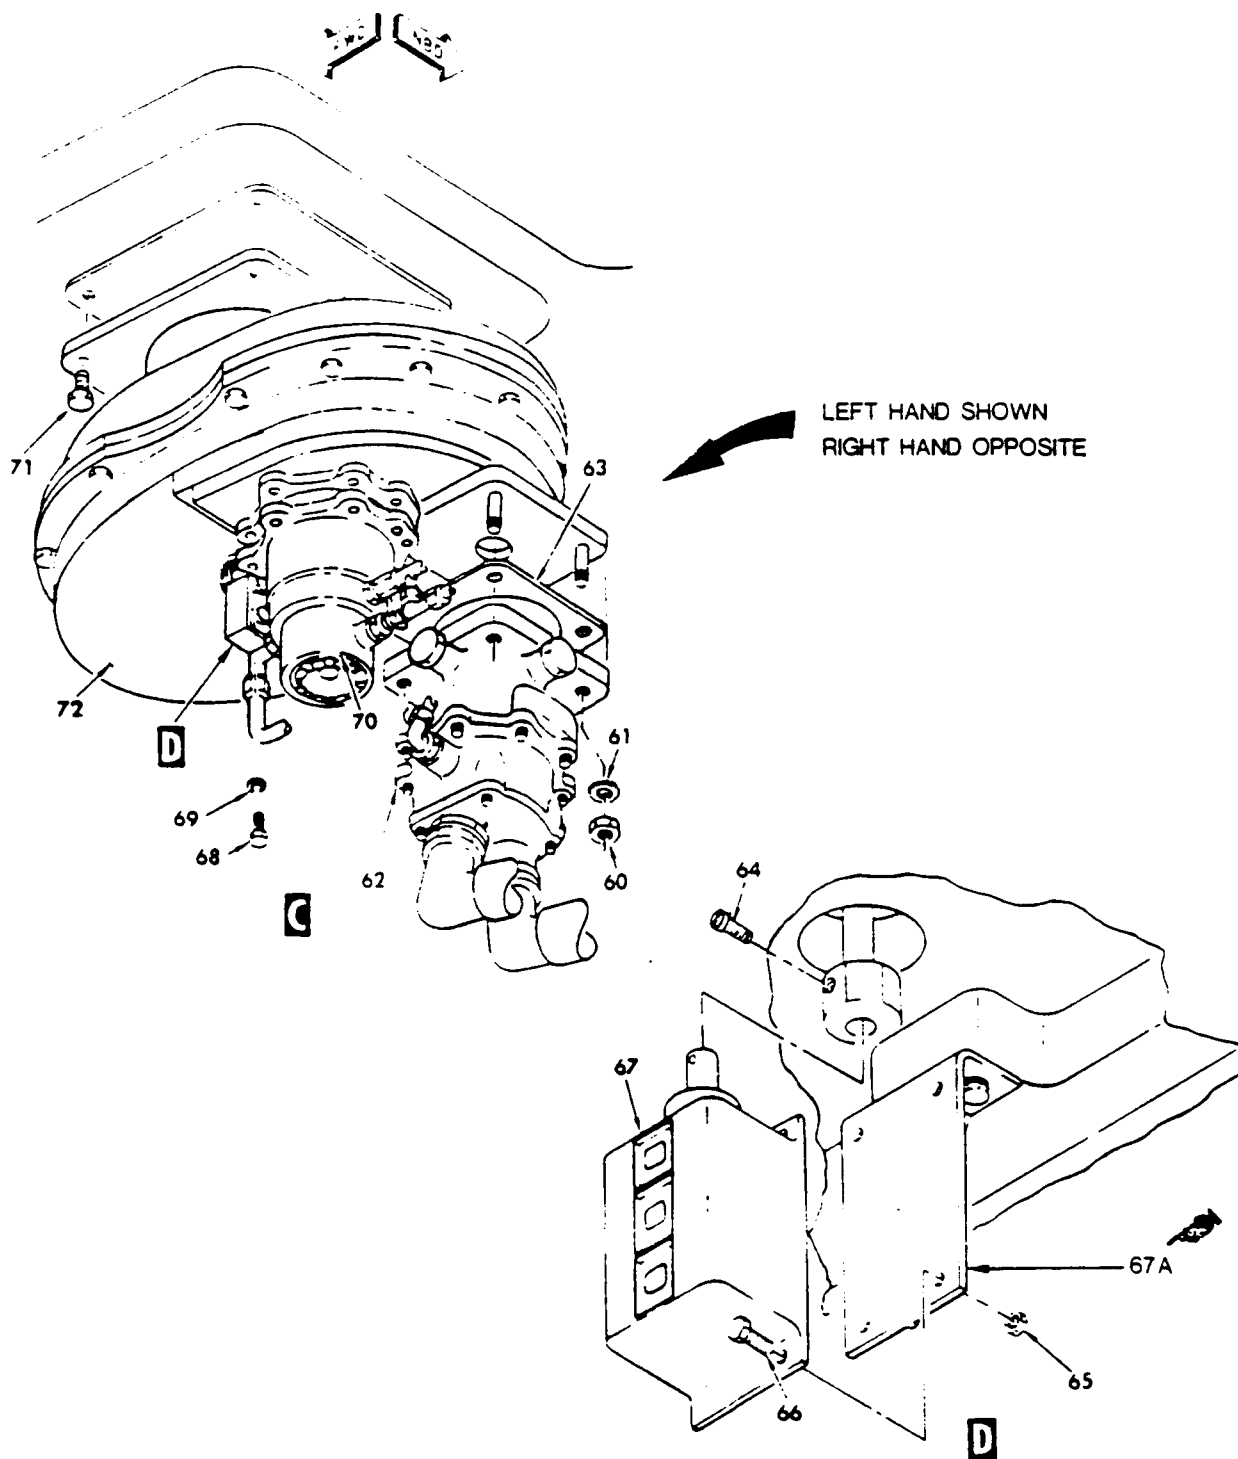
RH Aft Strut Assembly (Sheet 3 of 18)
